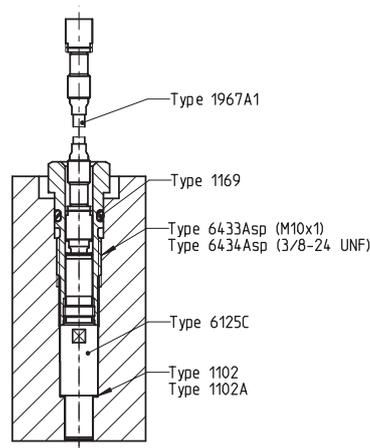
Mounting sensor Type 6125C... with mounting sleeve
